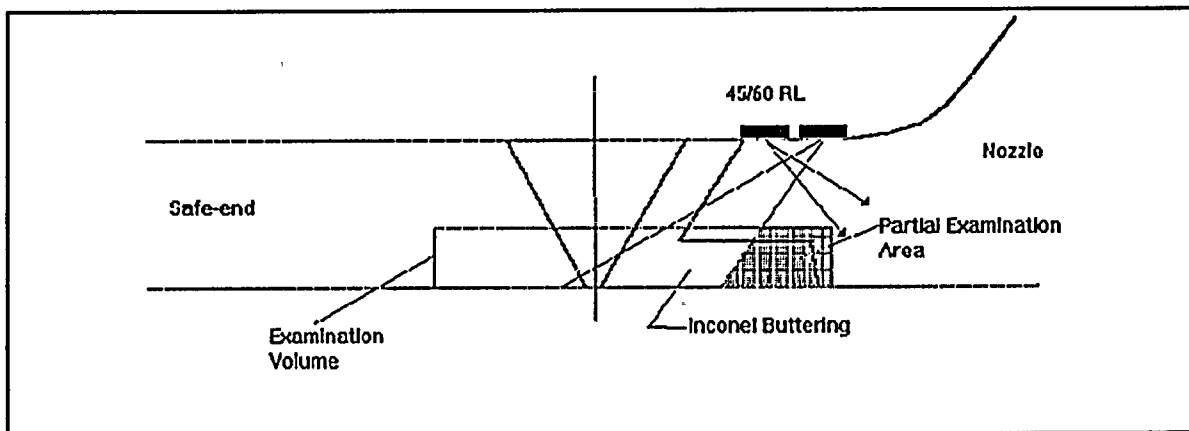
Typical Weld Volume Coverage for Nozzle-to-Safe-end Welds
